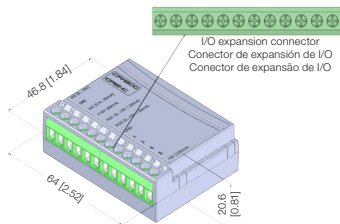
CFW300-IOAENC dimensions in mm [in] and connectors location
